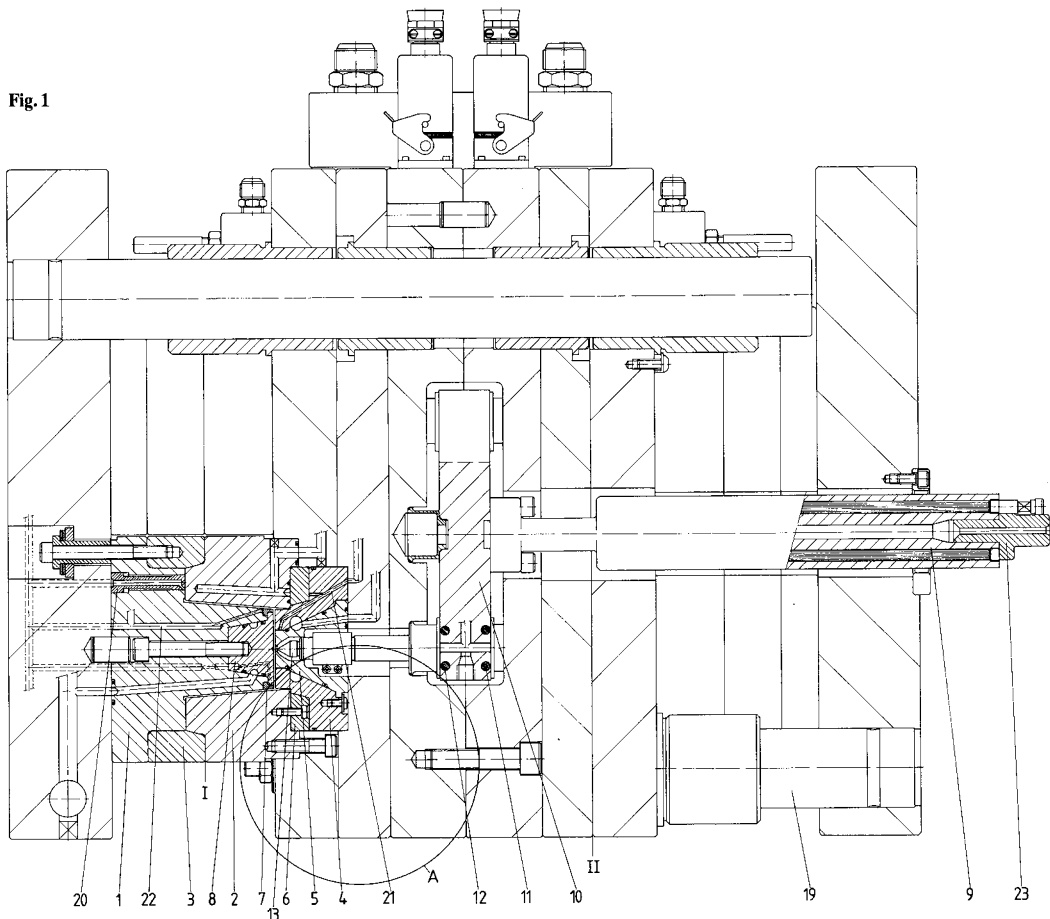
and 2 show how ruggedly the entire mold, including core and cavity, has been dimensioned. Each core (1) and its allotted cavity (2) are aligned by the ring (3). All part-forming components are hardened, while the mold plates are nickel-plated. The mold has been designed with the aid of a CAD system and its components have been produced by means of CAM techniques.
